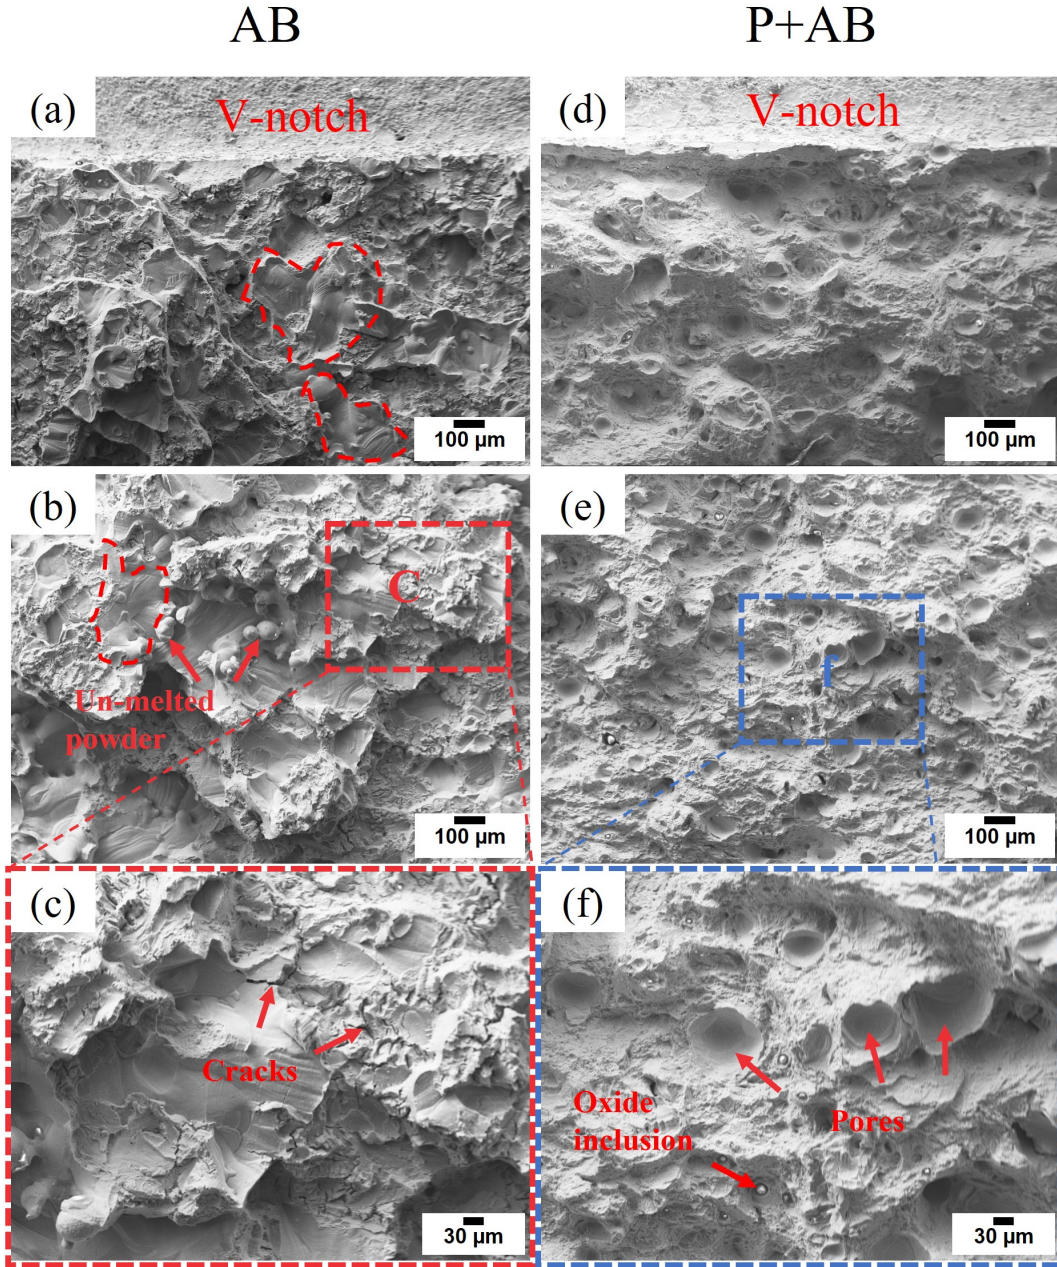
The fractography of specimens after the Charpy impact test showing the fracture mechanism and defects affecting the impact ductility [124]. (a) (b) (c) AB and (d) (e) (f) P+AB.
